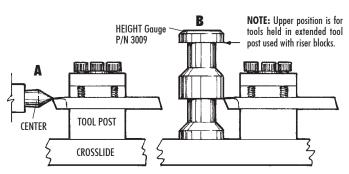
Leveling the tool using (A) the tip of a head- or tailstock center or (B) Sherline's tool height gauge P/N 3009.
